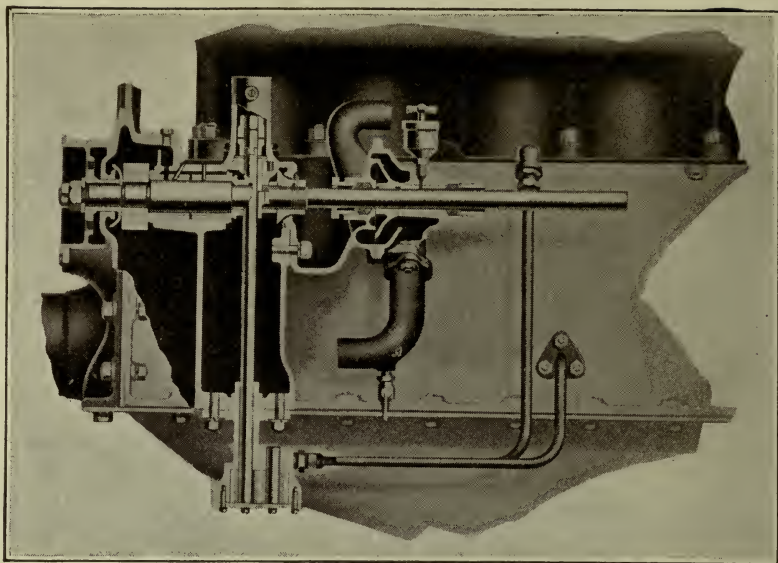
Continental 7R showing Gear Type Oil Pump.
